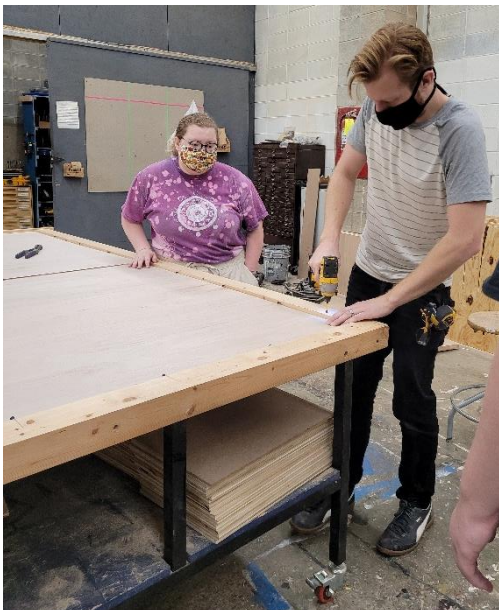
Assistant TD, Patrick LoRicco works with lab students to stable the Luan so the wall pattern could be sketched on
